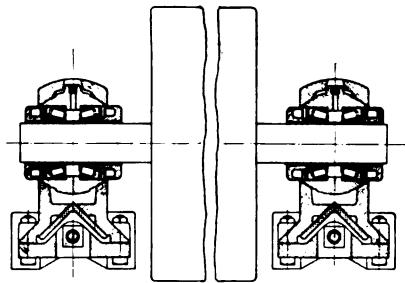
TYPICAL BEARING MOUNTING FOR TAKE-UP PULLEY
